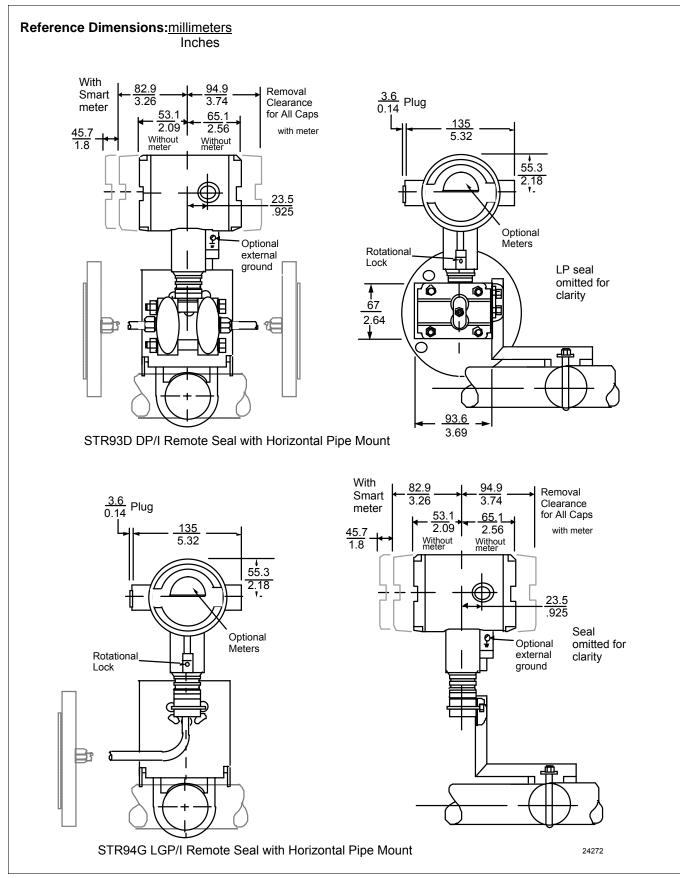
Approximate horizontal mounting dimensions for Remote Seal Transmitter.
